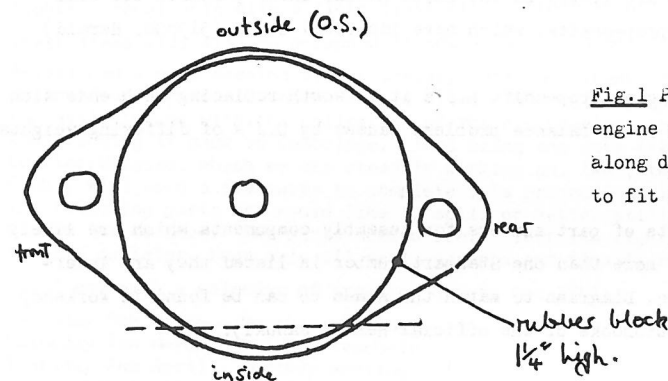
Plan view of Standard 10 engine mount; cut with hacksaw along dotted line for modification to fit Herald.
